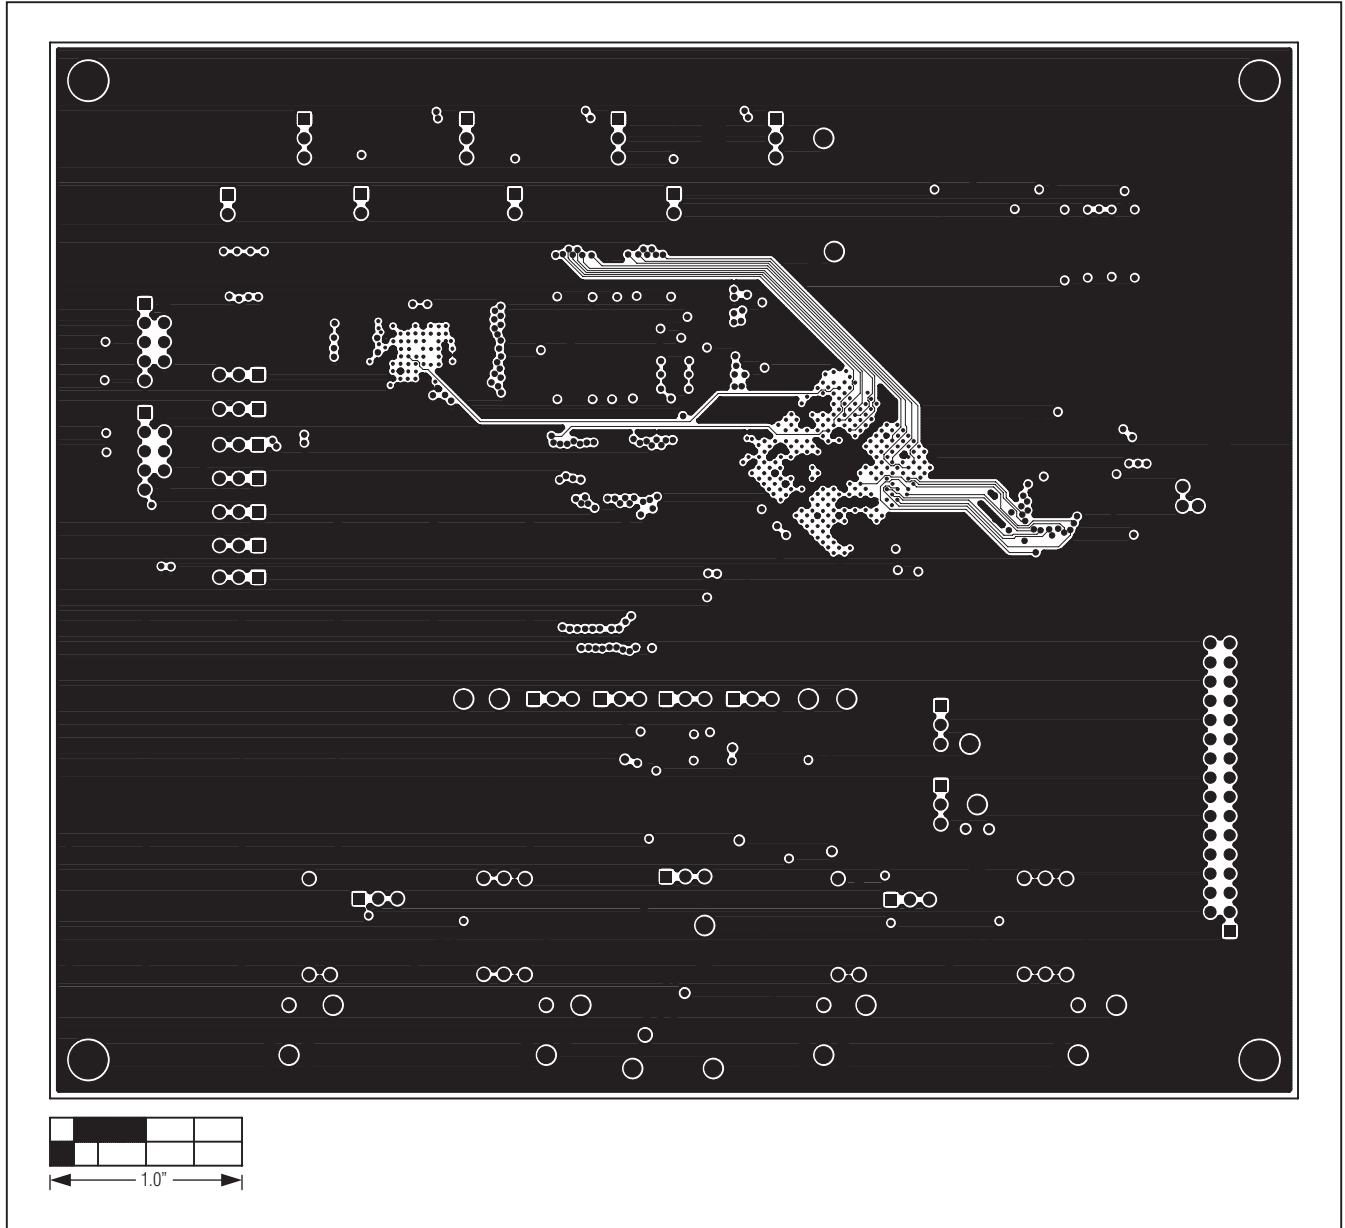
MAX11666 EV Kit PCB Layout—Layer 7
